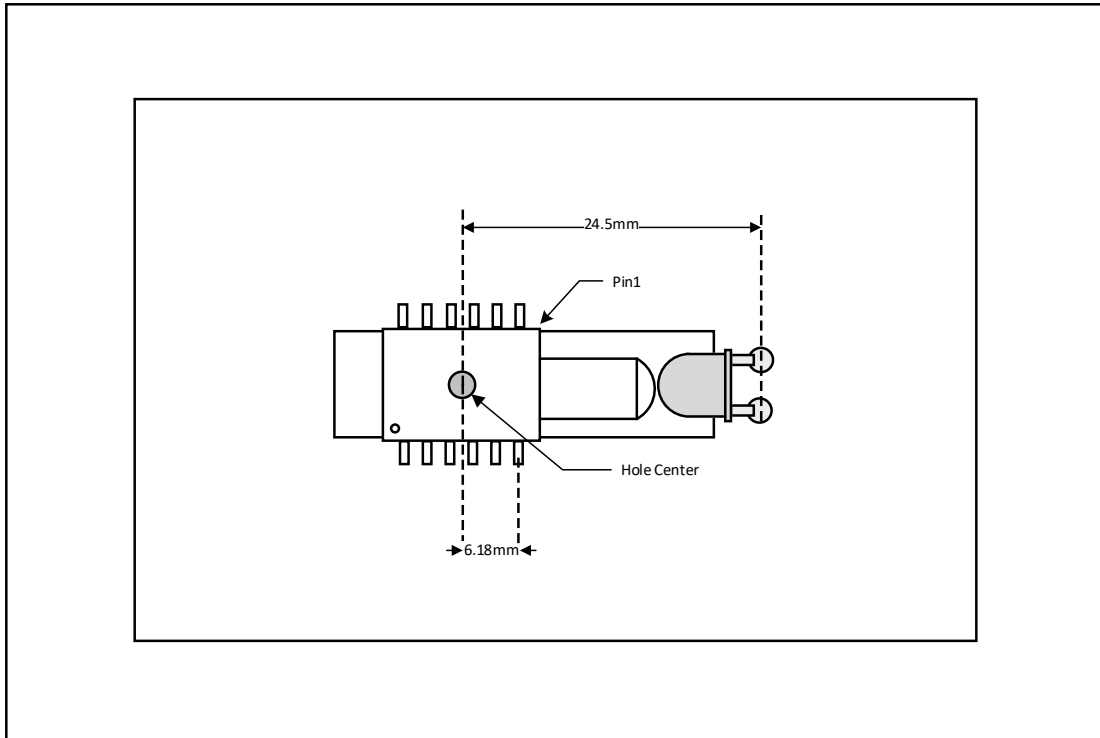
2D Assembly drawing of A603P (Top and Side View)
